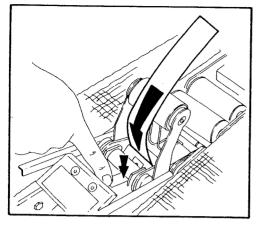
TAPE THREADING DIAGRAM - BOTTOM TAPING HEAD - LEFT SIDE VIEW
